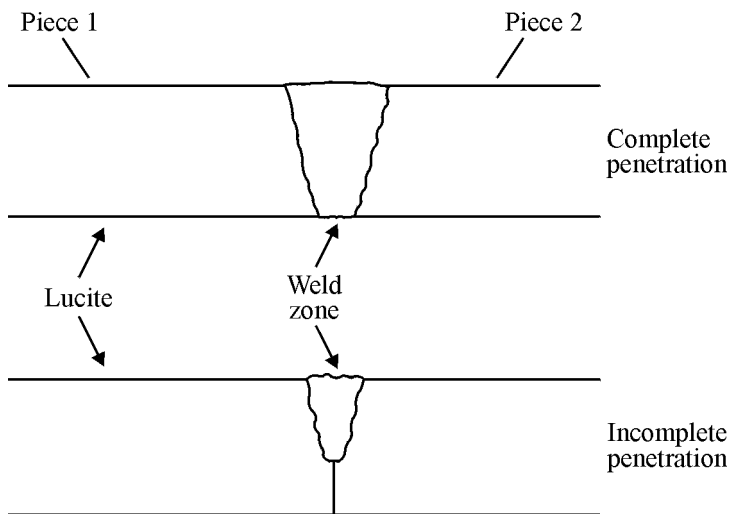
Appearance of weld zones for a butt weld between two thin sheets
